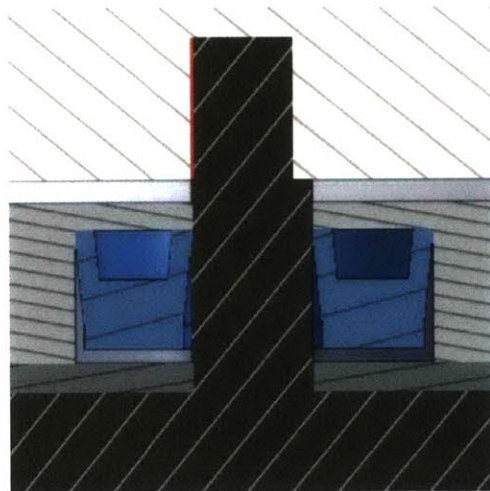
A cross-section of the u-cup, groove, and retaining ring for the shaft seal. The U-cup is shown in blue.
